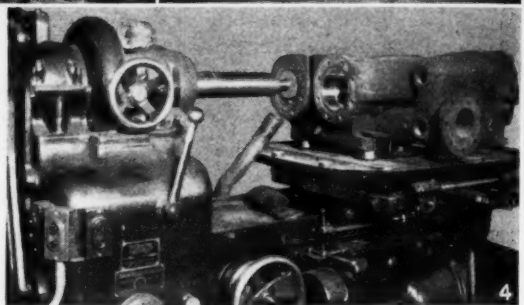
Drilling out worn grease cup holes in side rods for re-bushing. Fig. 3—Milling guides, using an inserted-tooth spiral cutter in a vertical milling machine. Fig. 4—Grinding bores in a cylinder casting for a feed water pump, using a Micro grinder.
